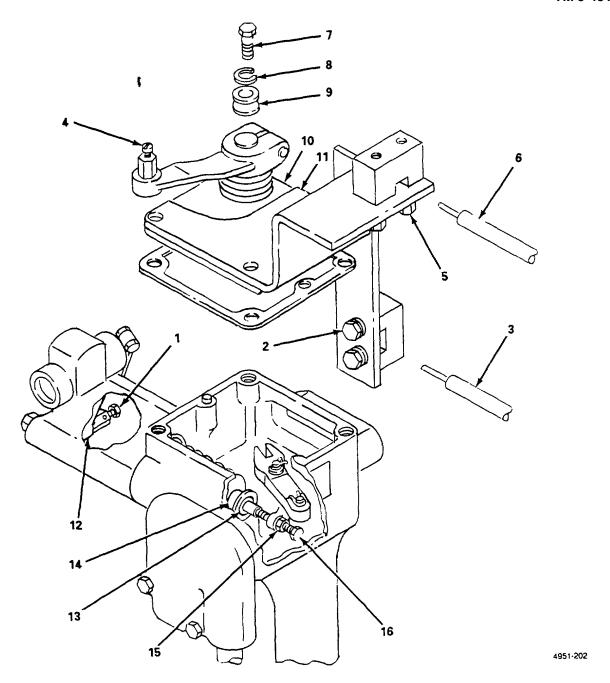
Governor, Adjust (Sheet 1 of 2).
